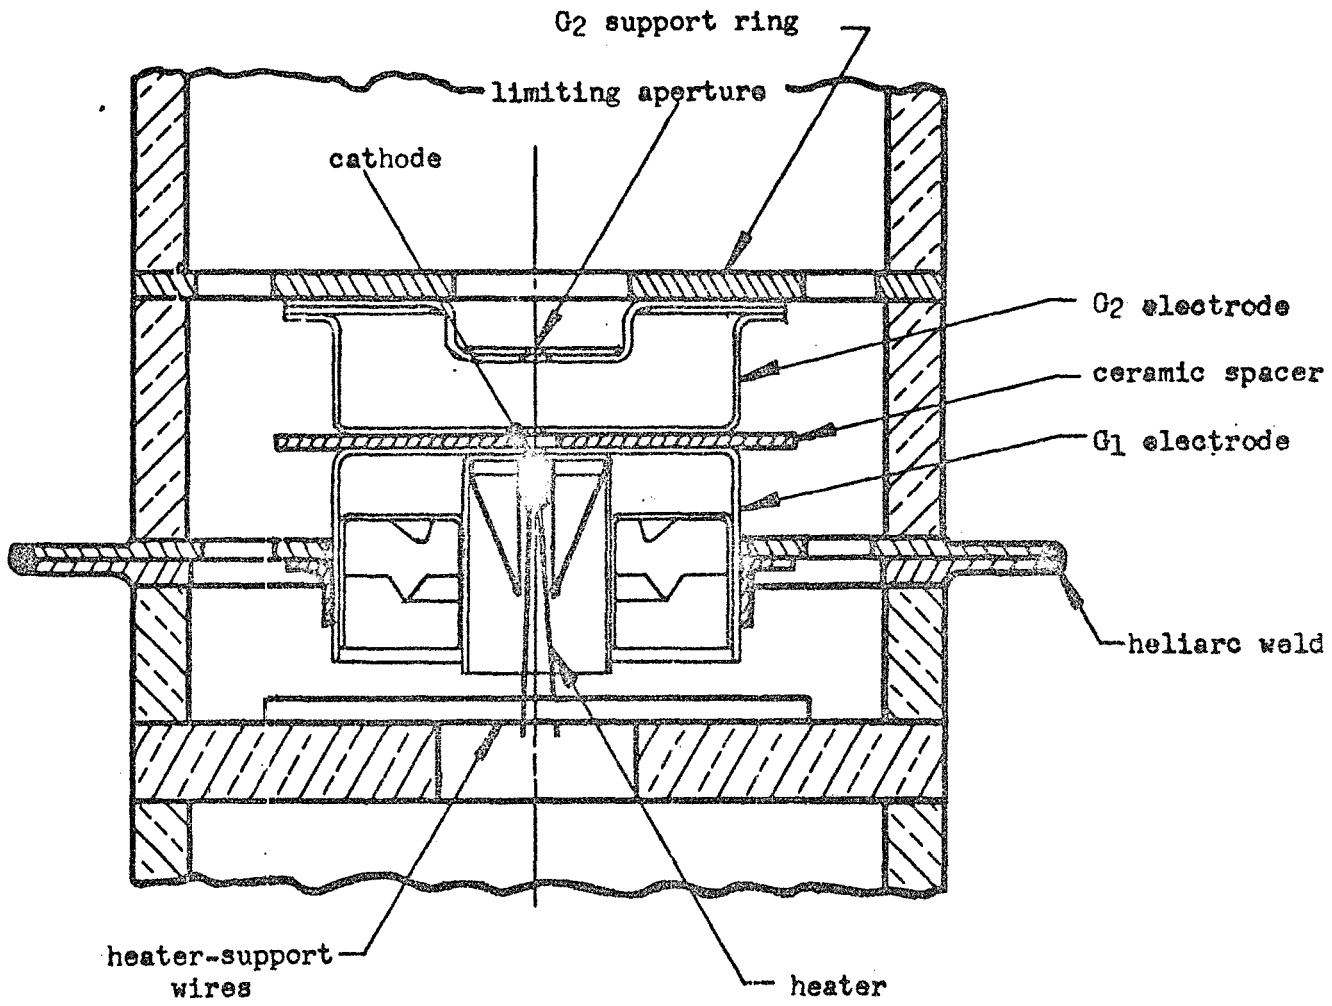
Cross Sectional View of Gun Section of Ceramic Vidicon
